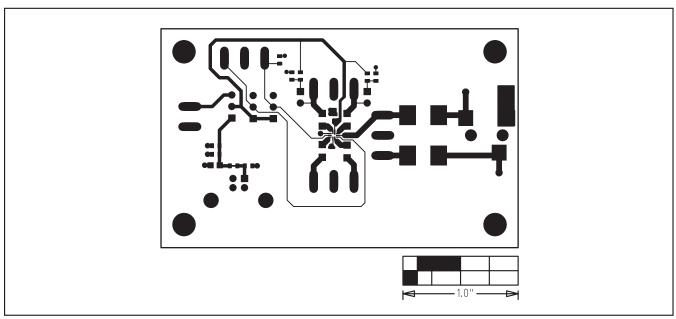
MAX4993 EV Kit PCB Layout—Component Side
